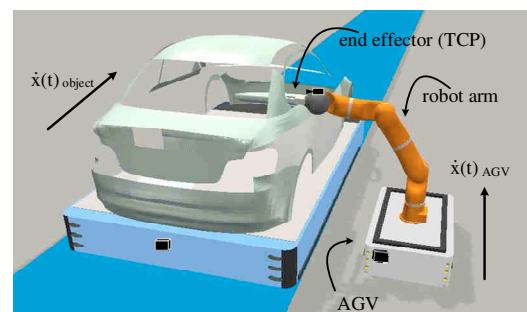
The mobile system for manufacturing task on a continuous conveyor.
